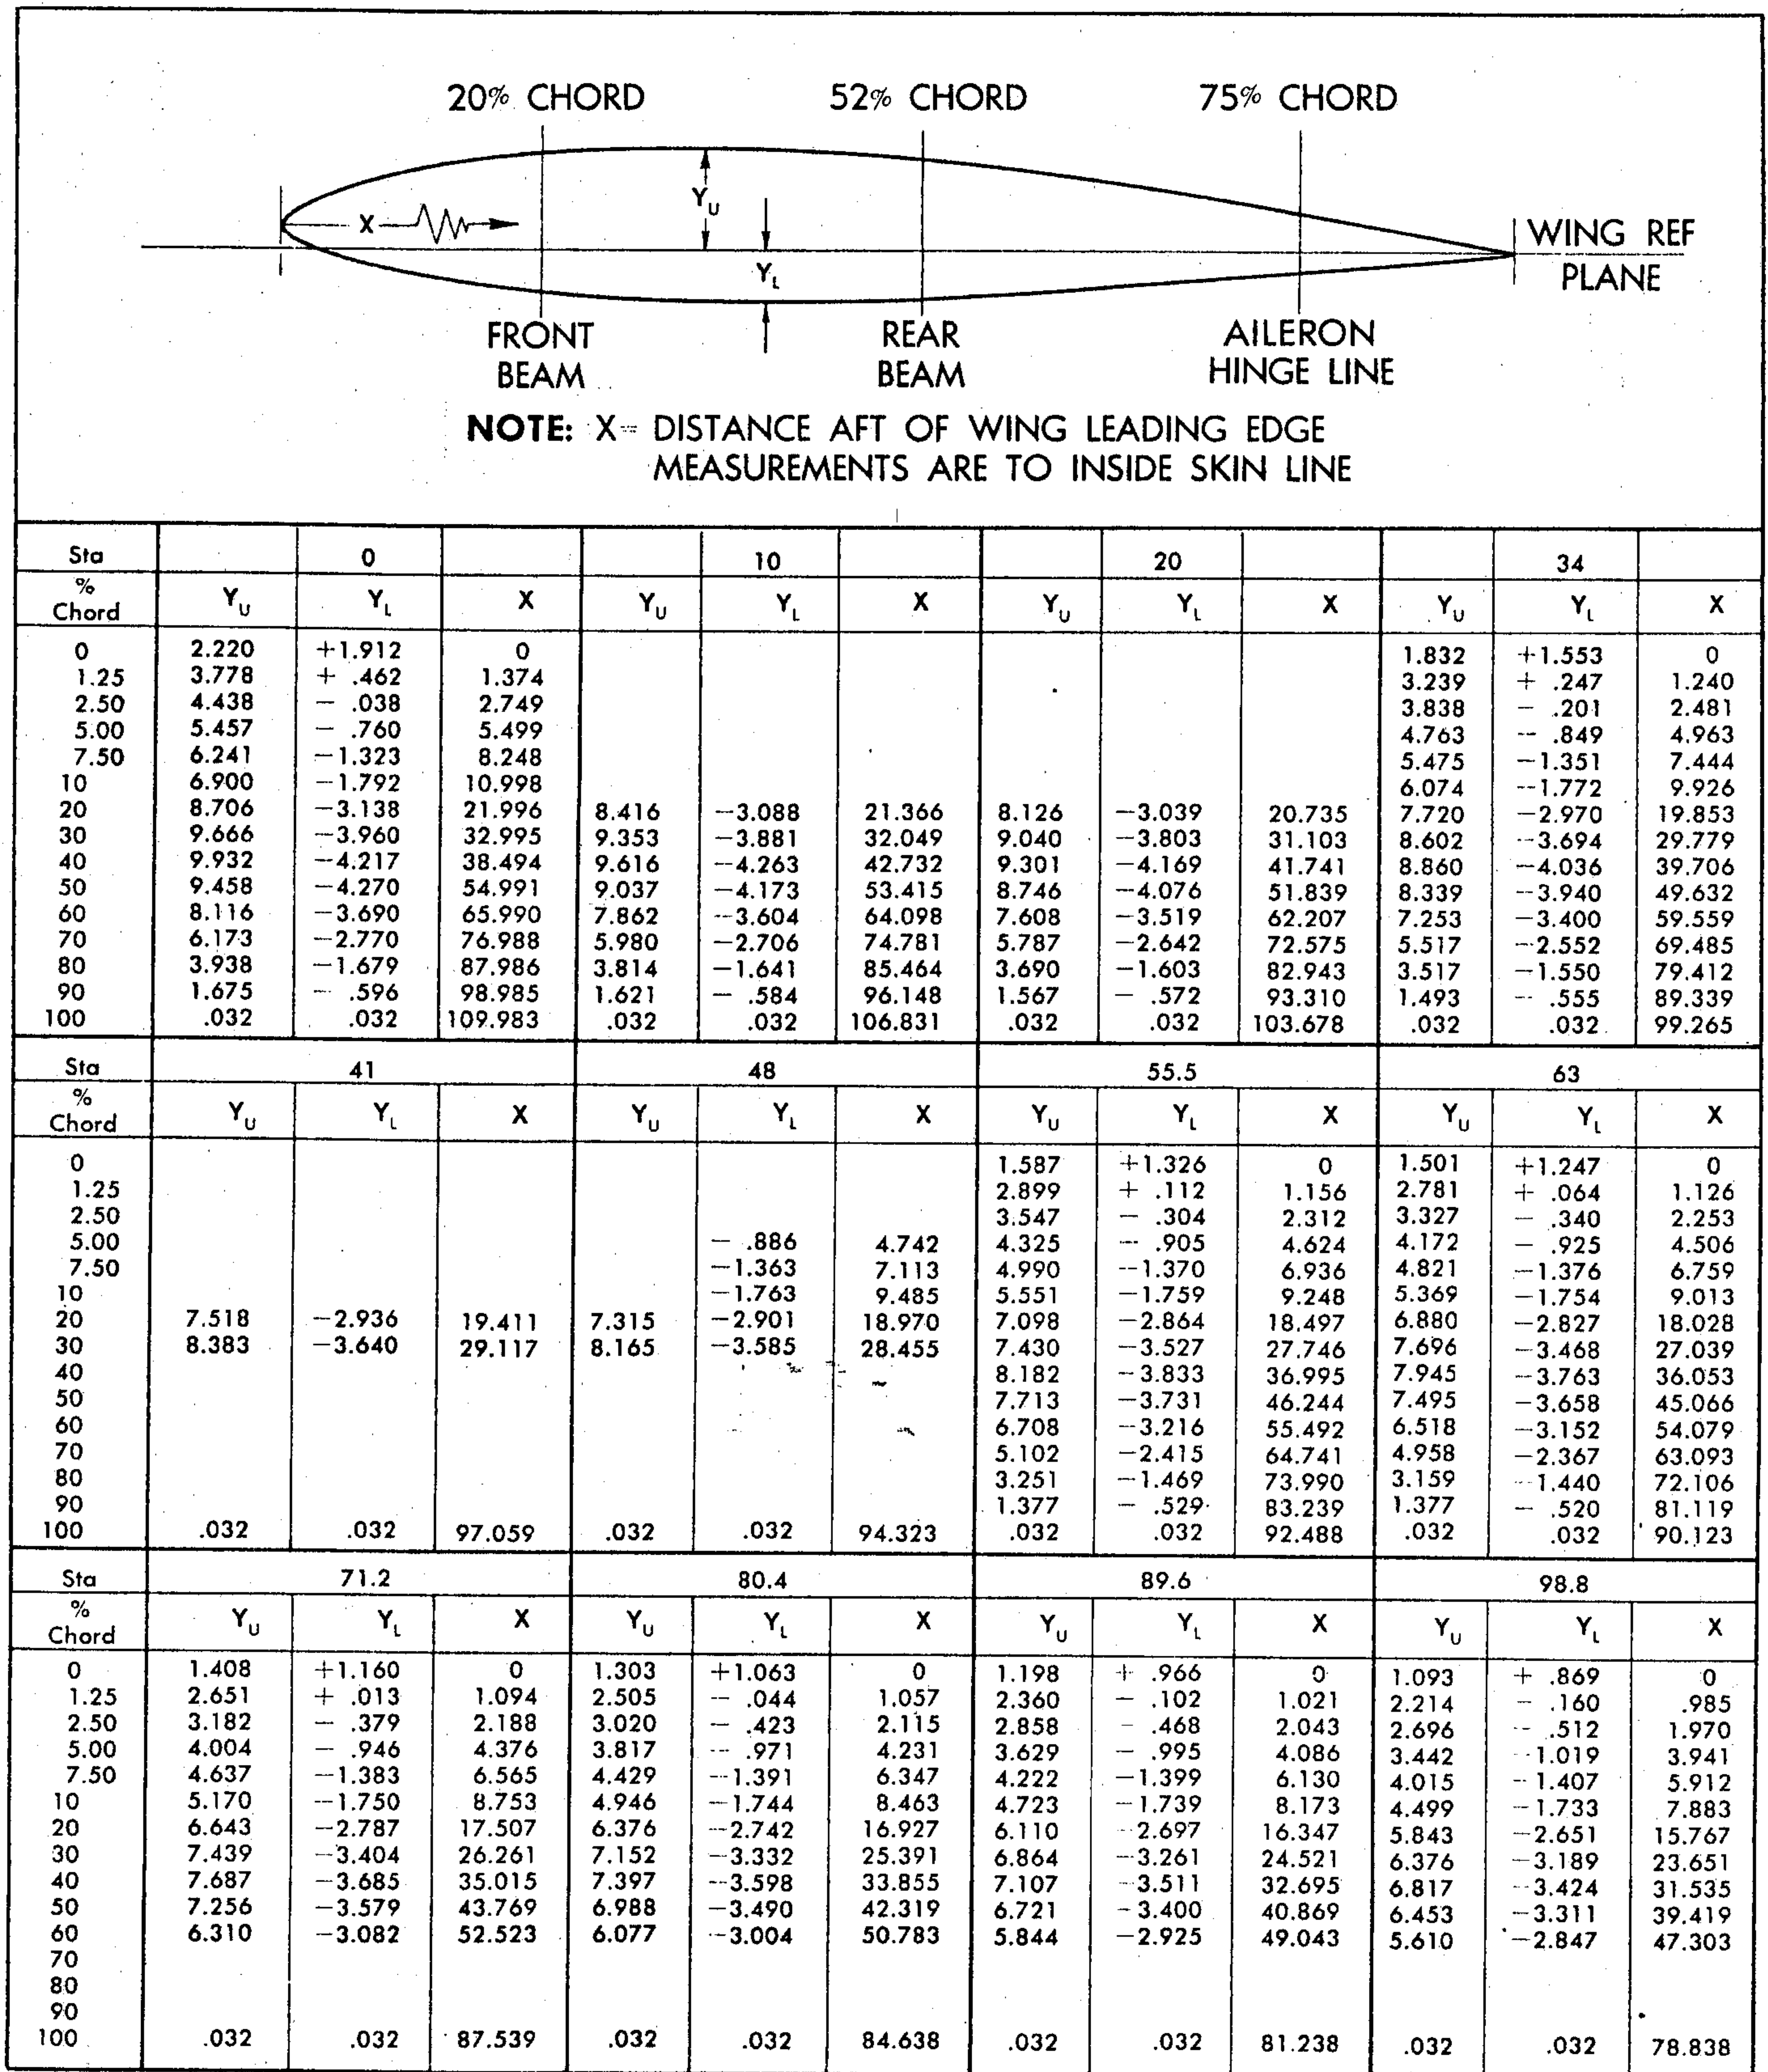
(Sheet 1 of 2 Sheets) — Wing Basic Dimensions
